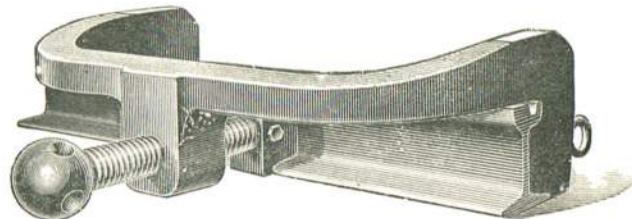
B. JIM CROW to bend either head or flange of rail, with packing pieces to bend odd size rails.
